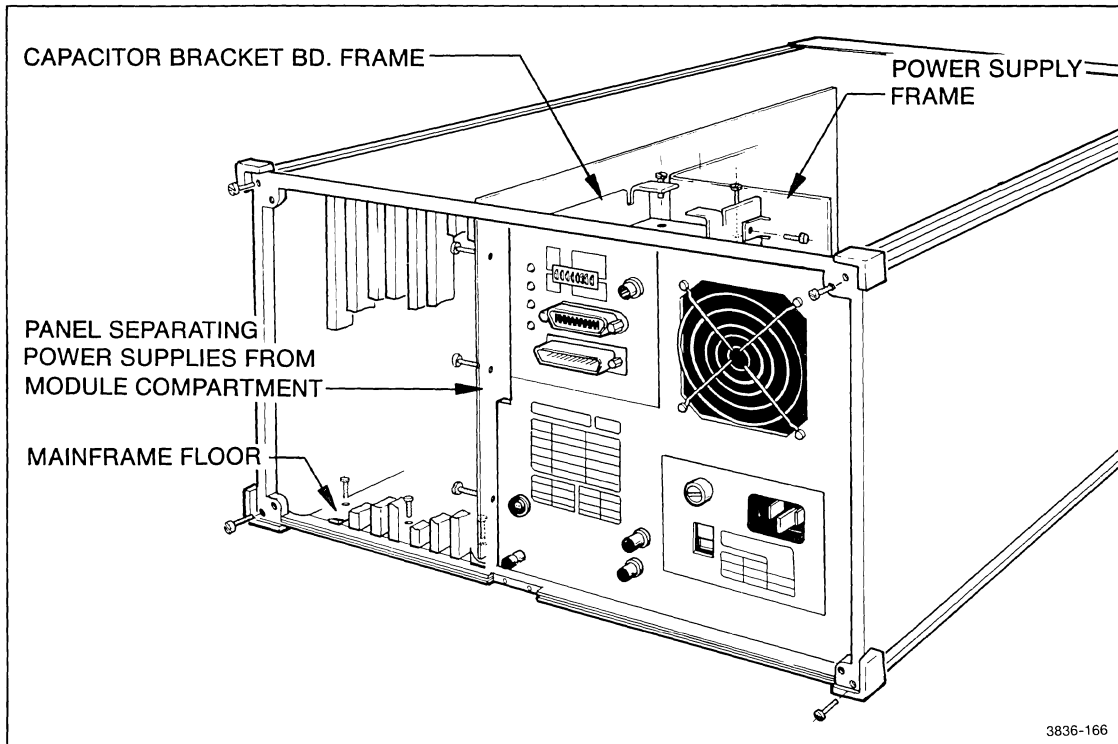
Removing the rear casting so the interconnect board can be removed from the mainframe (MONO-CHROME ONLY).
